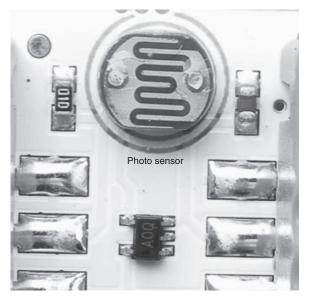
A typical photo sensor mounted on a circuit board.
